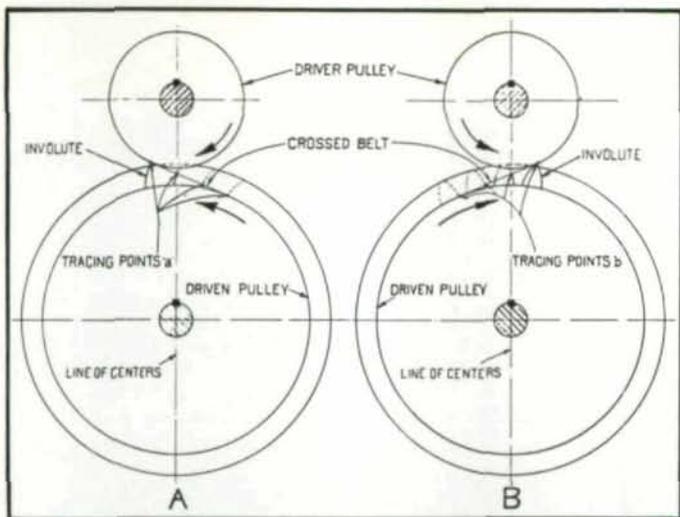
Diagram Showing How Equally-spaced Points on Crossed Belt Trace Successive Equally-spaced and Parallel Involute Profiles.
